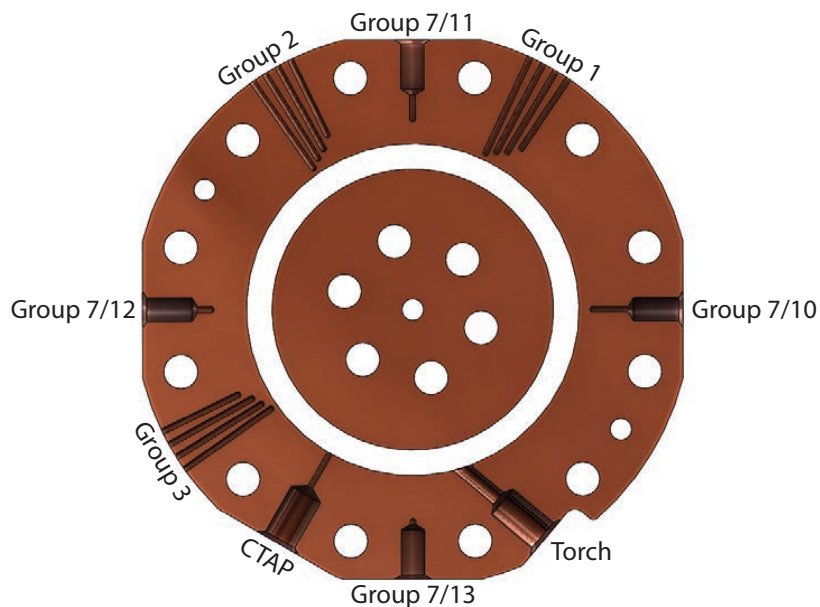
Section view of outer chamber igniter ring showing thermocouple probe locations in relation to igniter torch port (reproduced from Chapter 2).
